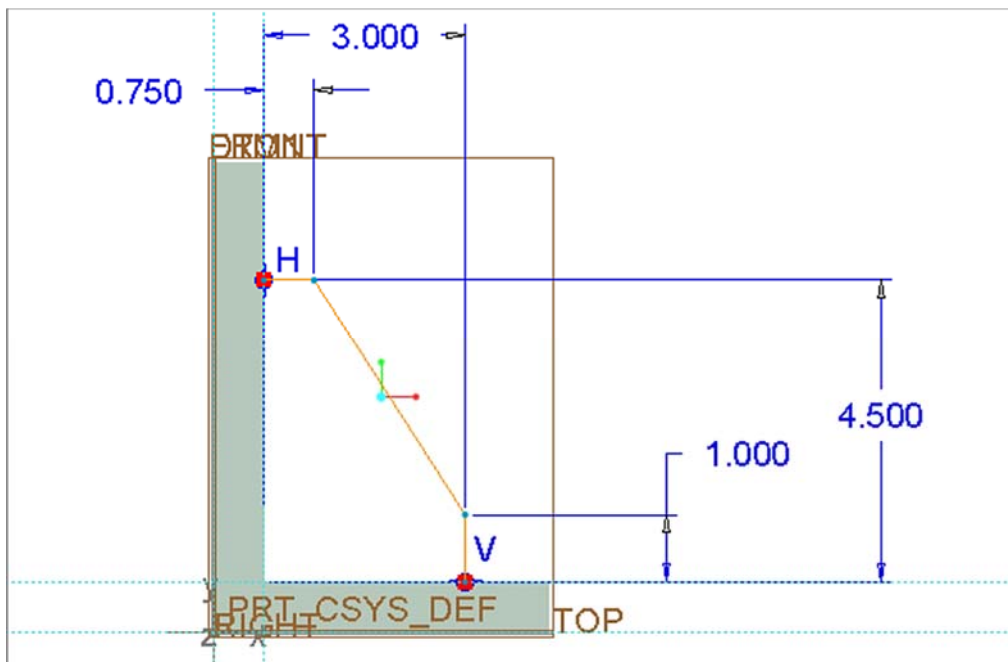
(b) Mounting Bracket will be 12.00 inches in Depth
